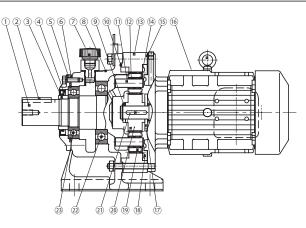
Type PHHM (Horizontal, Gearmotor) (Example: Frame size 6135)
